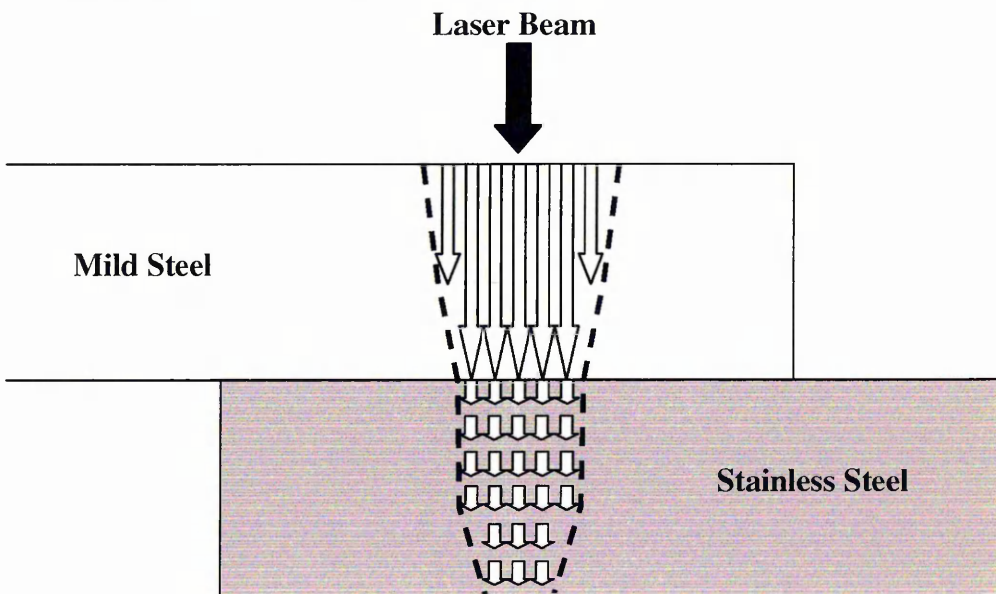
Schematic diagram showing weld bead formed due to base material thermal property differences – mild steel on the top of the lap joint
